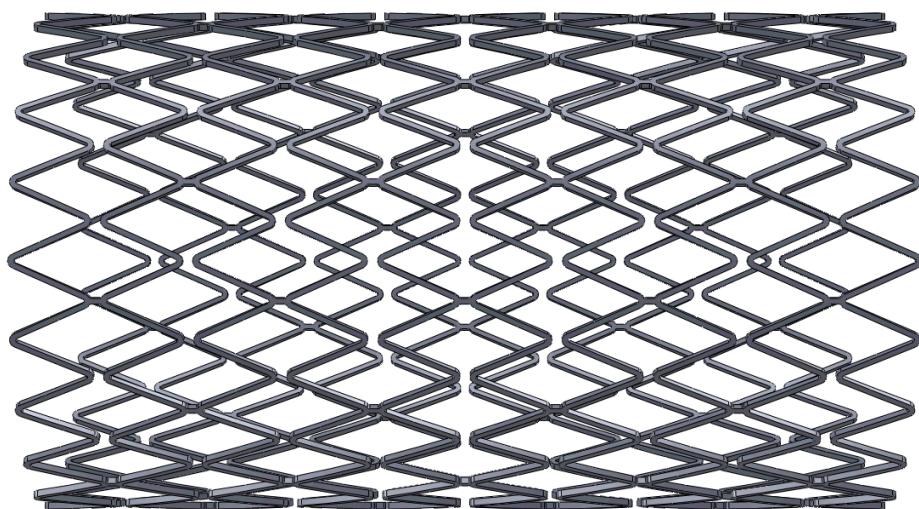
Cylindrical full stent, in the finished state. This geometry is suitable for supporting a final component specification.
